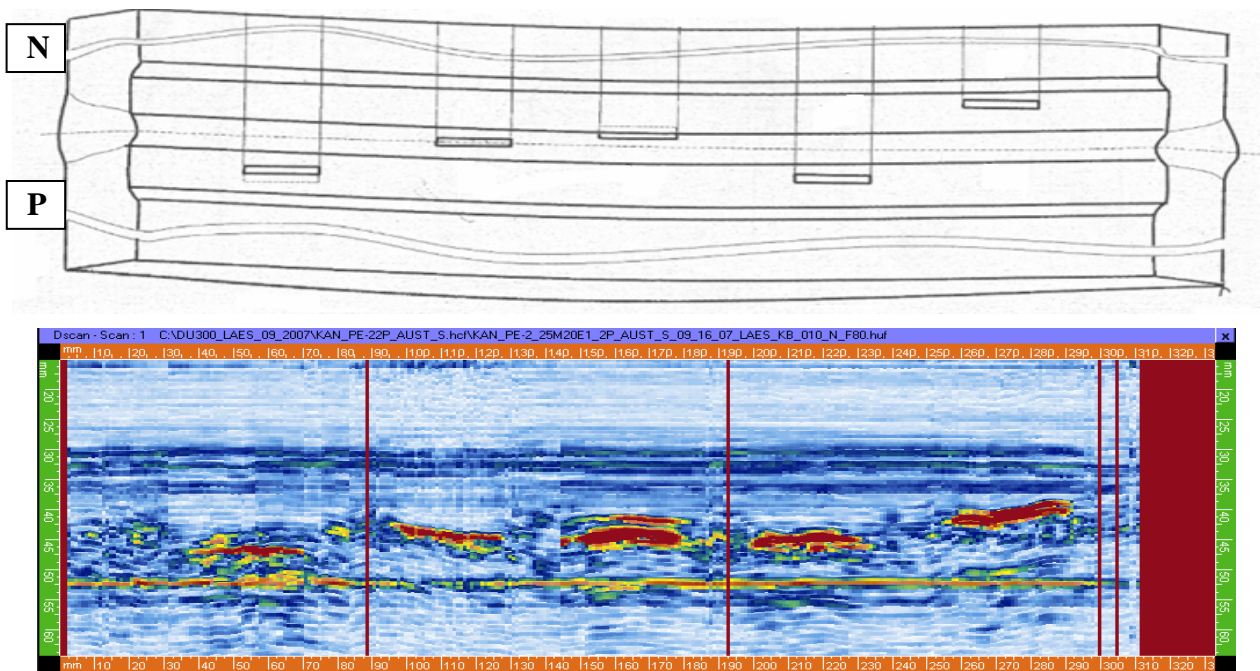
C-scan of austenitic weld Du300 weld test block. Inspection from the N-side. Operation PA frequency 2.25 MHz.
